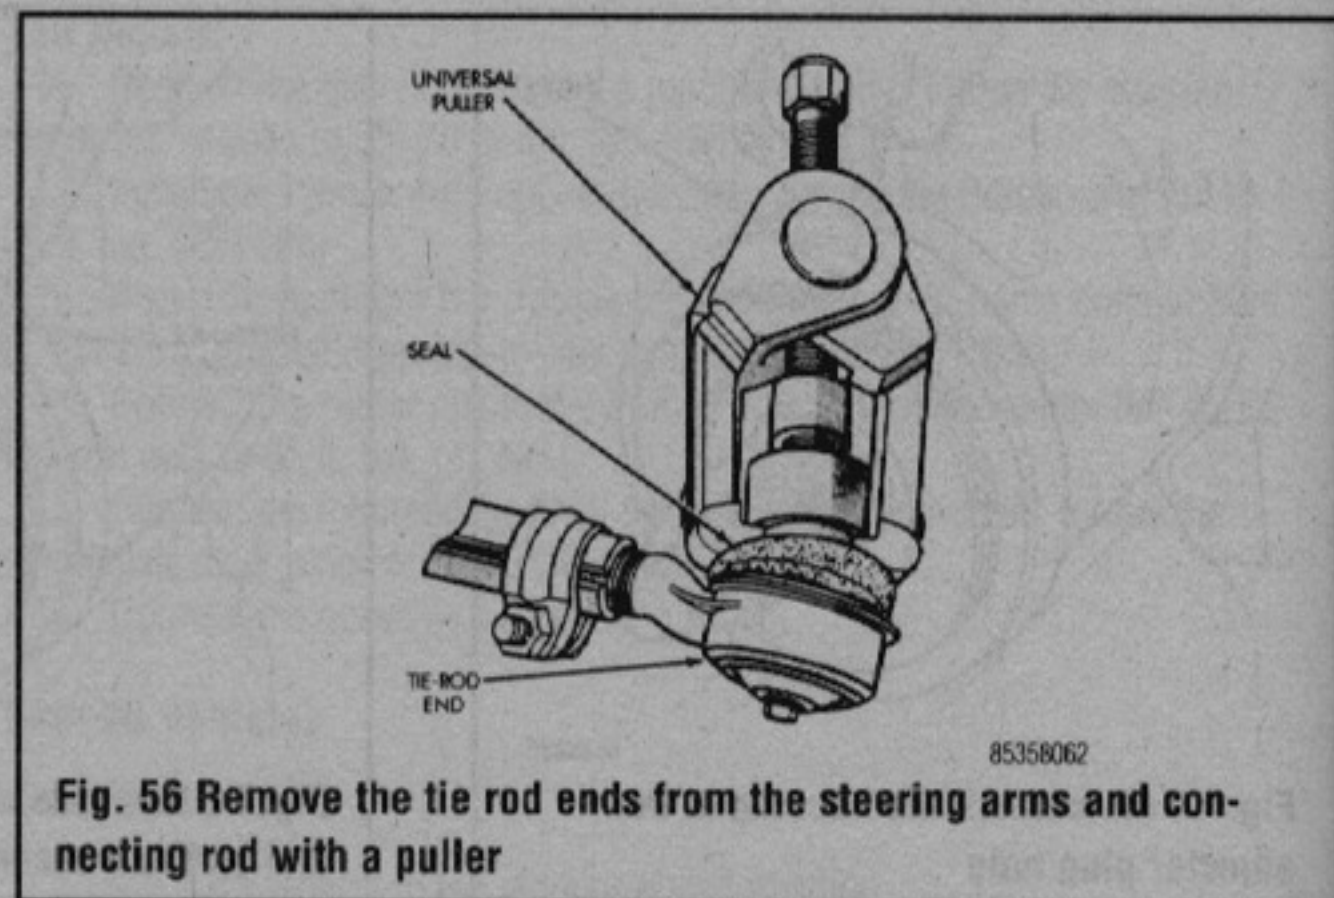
Remove the tie rod ends from the steering arms and connecting rod with a puller
